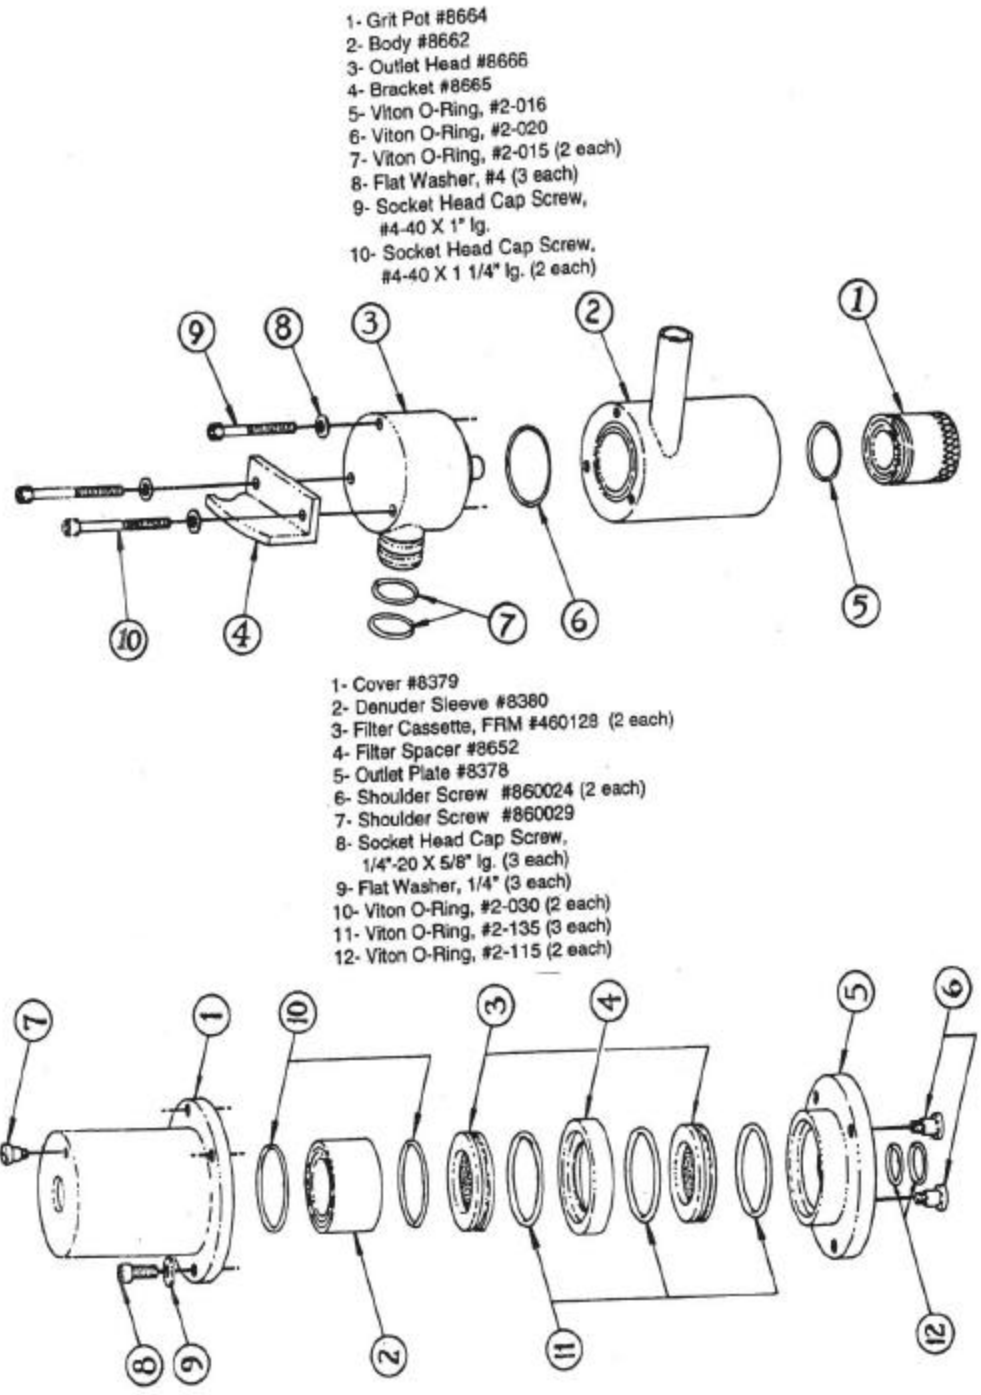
Sharp Cut Cyclone (SCC) and Canister Assembly
